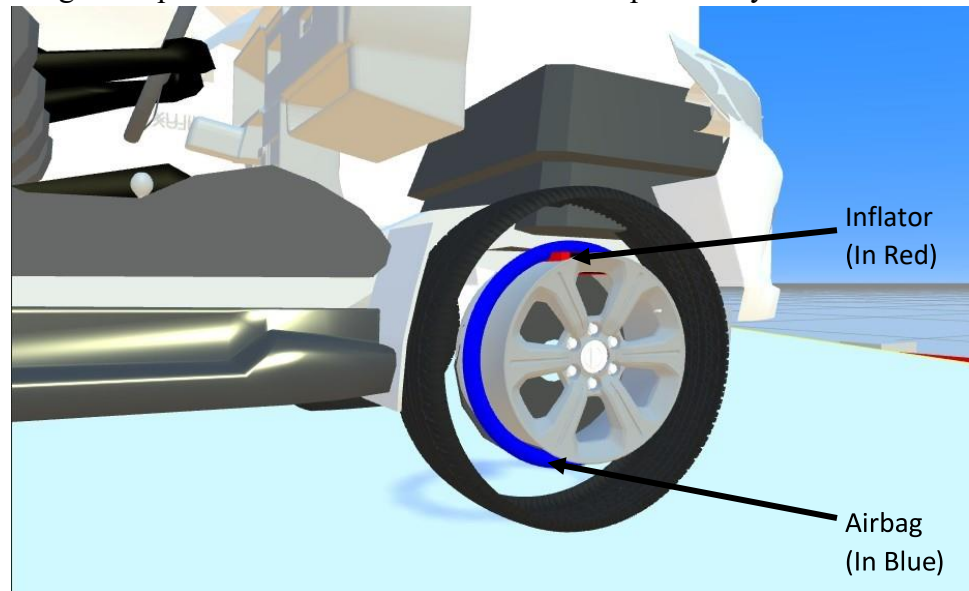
Placement of Wheel Airbag in vehicle chassis or suspension system
